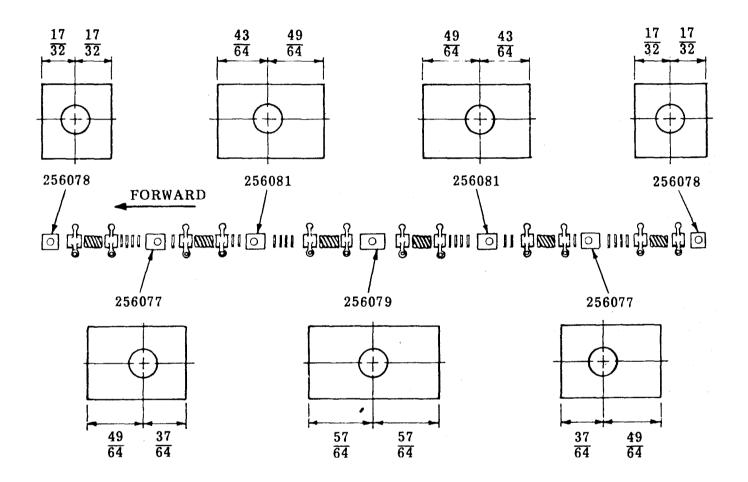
Rocker Arm Mounting Blocks Installation.
